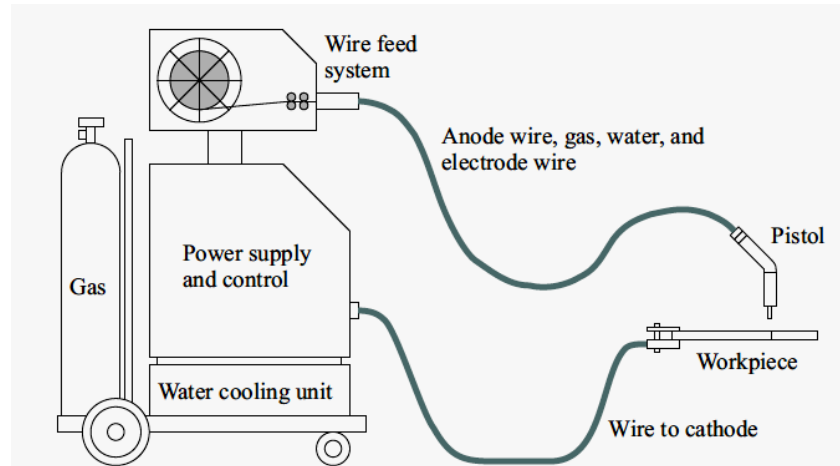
Typical Gas Metal Arc Welding Machine
